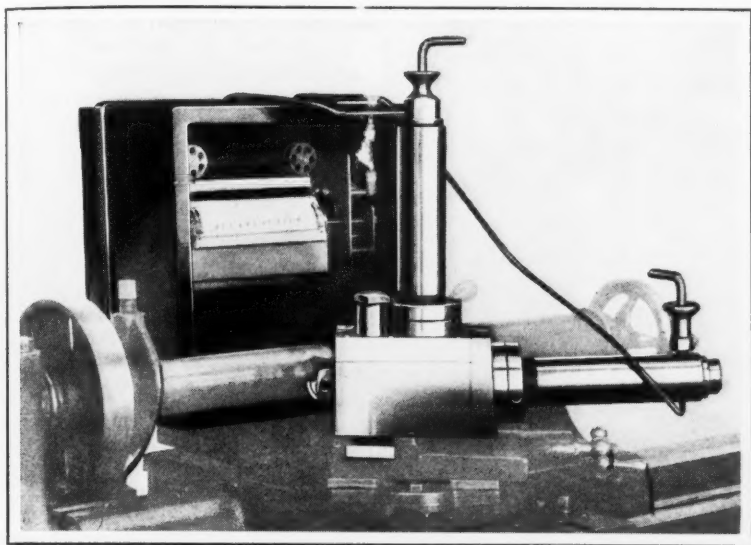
Hall "Machinabilimeter" Devised for Determining the Pressure on Tools in Cutting Metals
